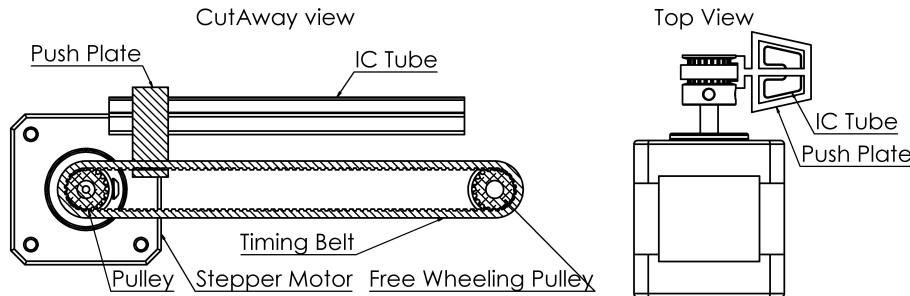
Feed up design with cutaway and top view to illustrate how it operates.
